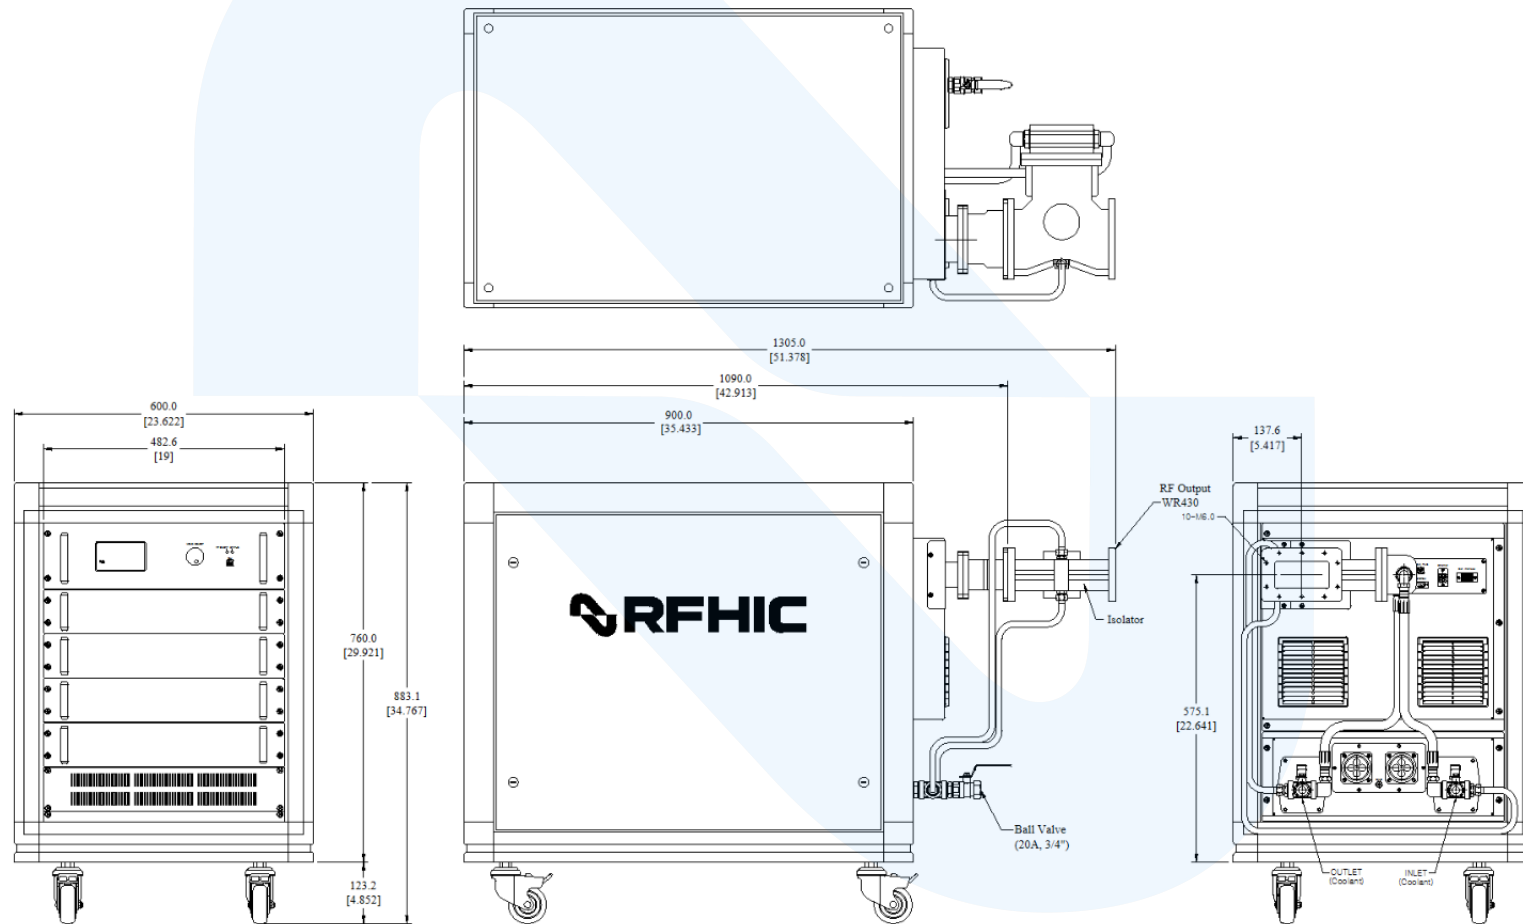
RIK2512K-40TG_H GaN SSPA Head Front & Side View
